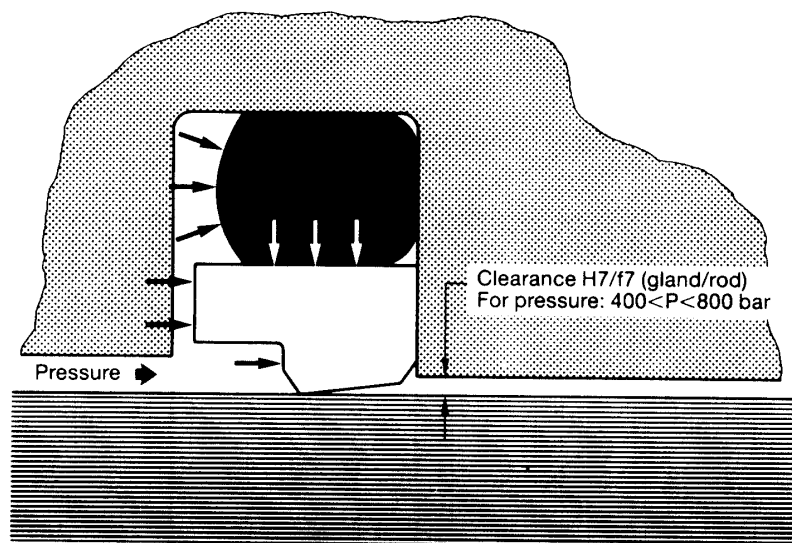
Shamban Stepseal K-R used for the stationary high-pressure gaskets in the high-pressure section. With a diameter of 100 mm, the rated pressure is 300 bars with 0.2 mm radial clearance
